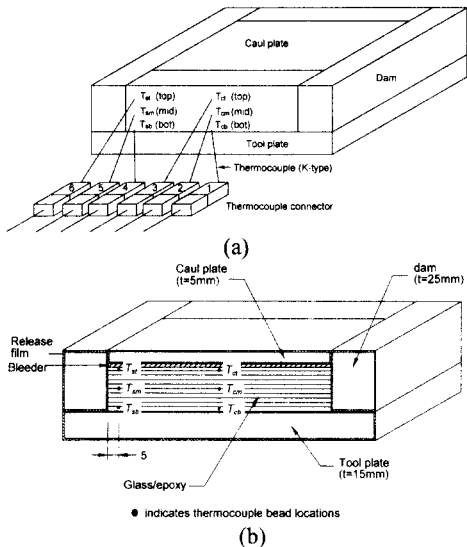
Schematic diagram of the experimental setup: (a) mold assembly and (b) sectional view of the mold assembly
